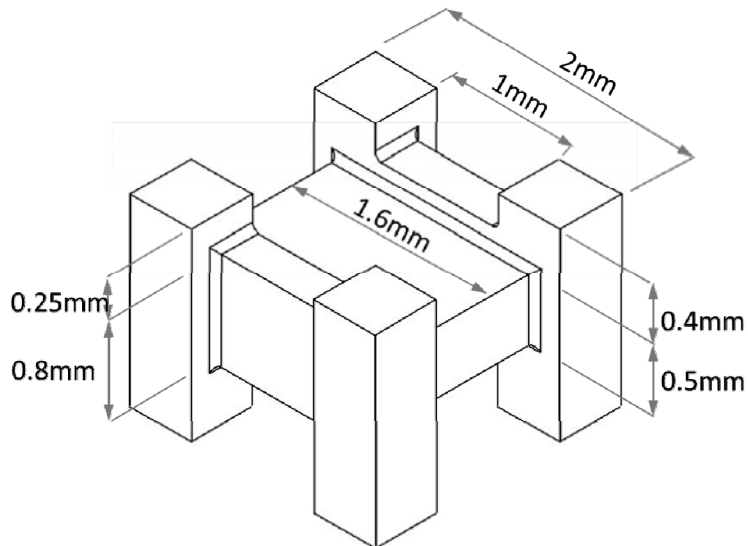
2 mm × 2 mm size H coil bobbin.
